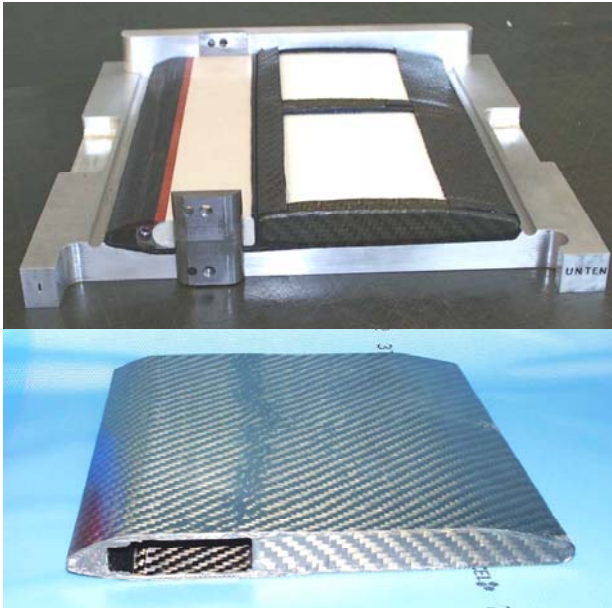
Flap unit housing during manufacturing and after release from the mold
